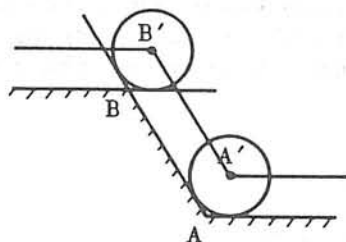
Tool Path in Path 500L-G/5000L-G
